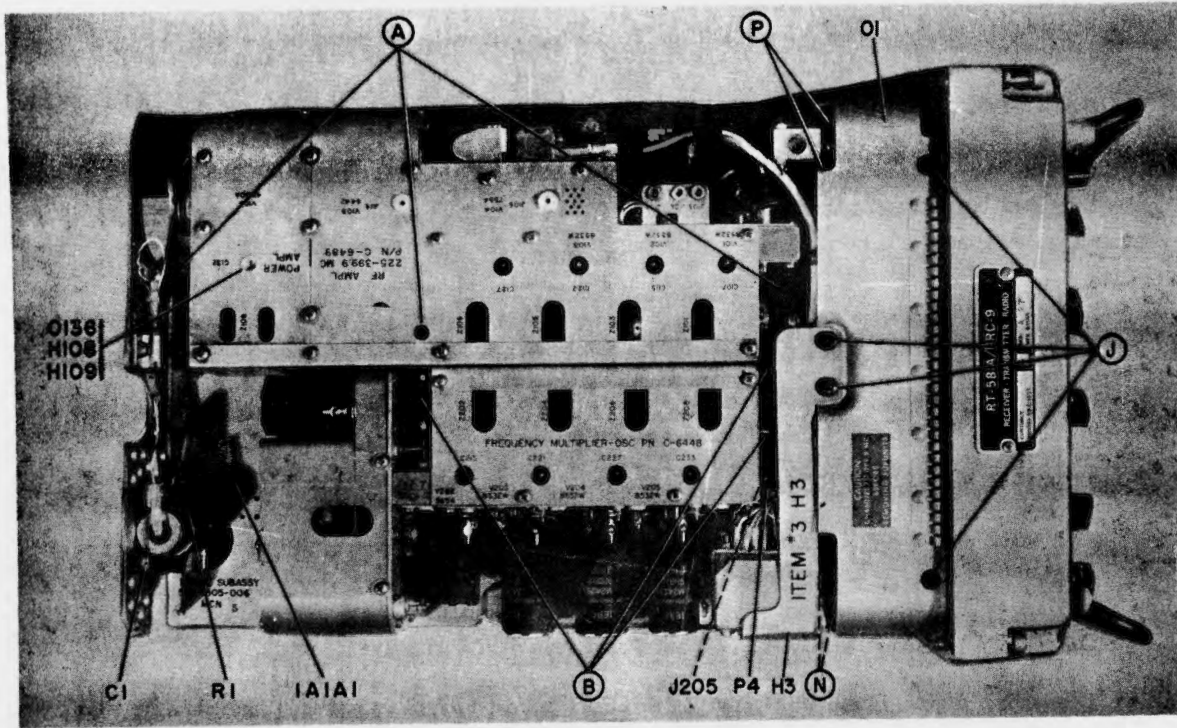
Receiver-Transmitter RT-581( )/URC-9, Top View, Subassembly Removal
